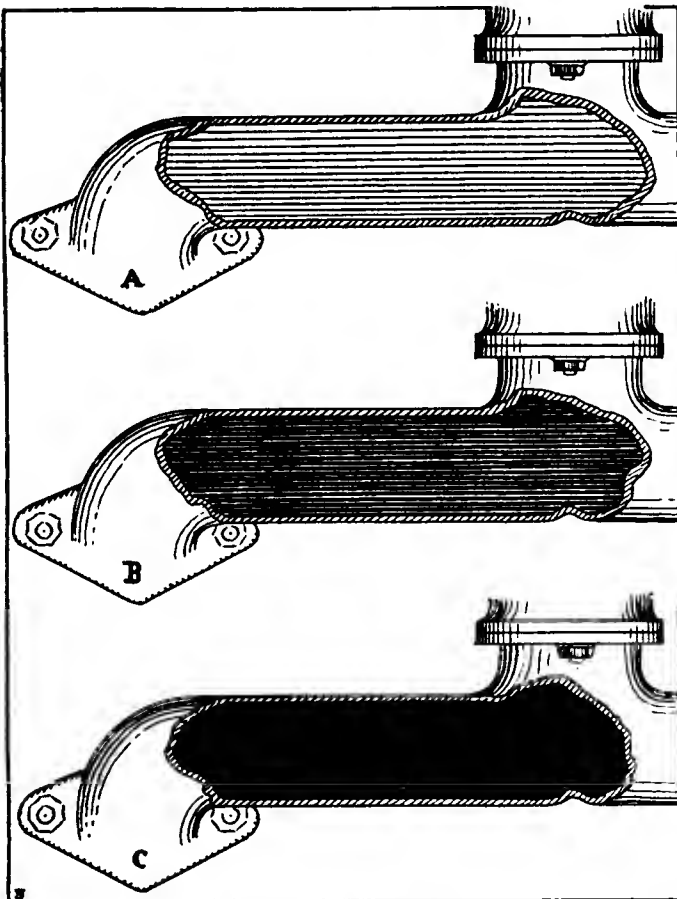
Carburetor manifold, (A) showing lean mixture, (B) proper mixture, (C) rich mixture.
